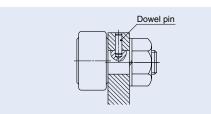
Mounting example of Solid Eccentric Stud Type Cam Follower
